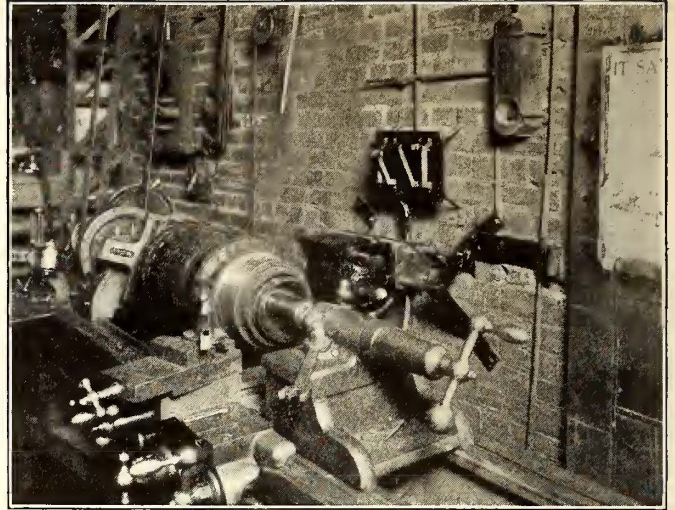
ADJUSTABLE TRANSFORMER USED FOR TESTING ARMATURES WHILE MOUNTED IN LATHE
